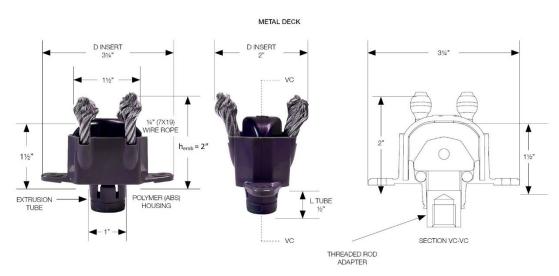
B—LOW PROFILE SPIDER SX-MD-LP WITH THREADED ROD ADAPTER (SX-ADP) INSERT ASSEMBLY
